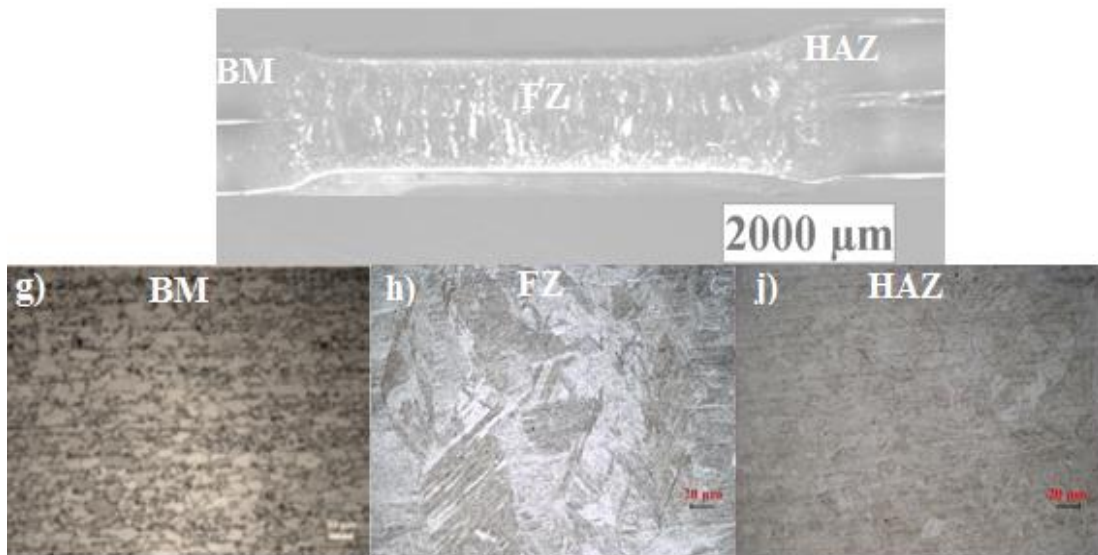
The microstructure of weldment joined with 3.5 Bar electrode force with 8kA welding current. a) DP600 base metal (BM), b) DP600 Heat Affect Zone (HAZ), c) DP600 weld nugget (FZ). parameters of (3.5 Bar – 8 kA).
